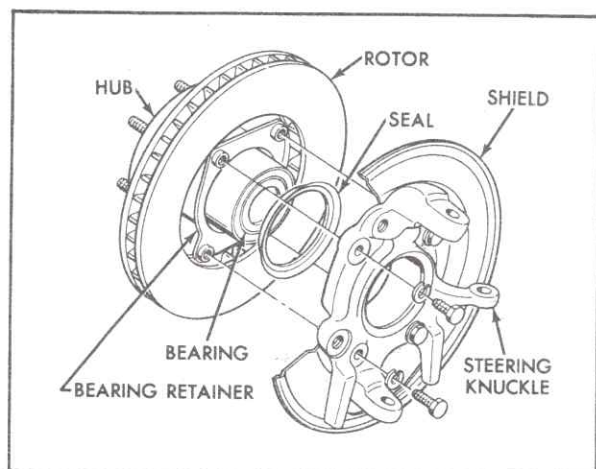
Front Hub Bearing and Retainer (Disc Brake)
